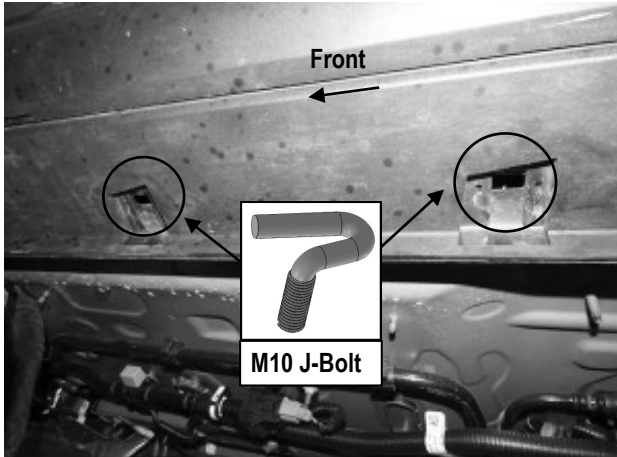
A5 (M10 J-Bolt) Installation (On Driver Side Mounting Location)
